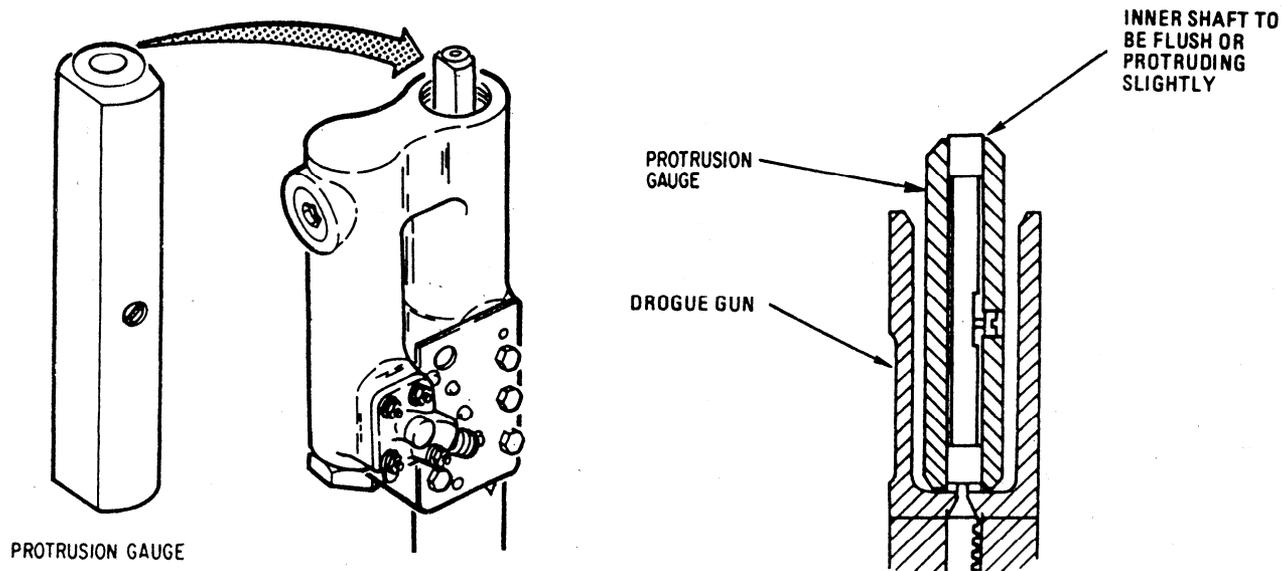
Drogue gun firing pin protrusion check-out.
